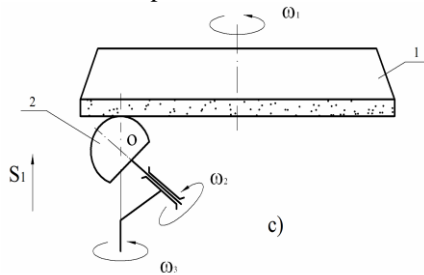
Formation scheme of the incomplete spherical surface by the flank diamond ring with double rotation of the part.
